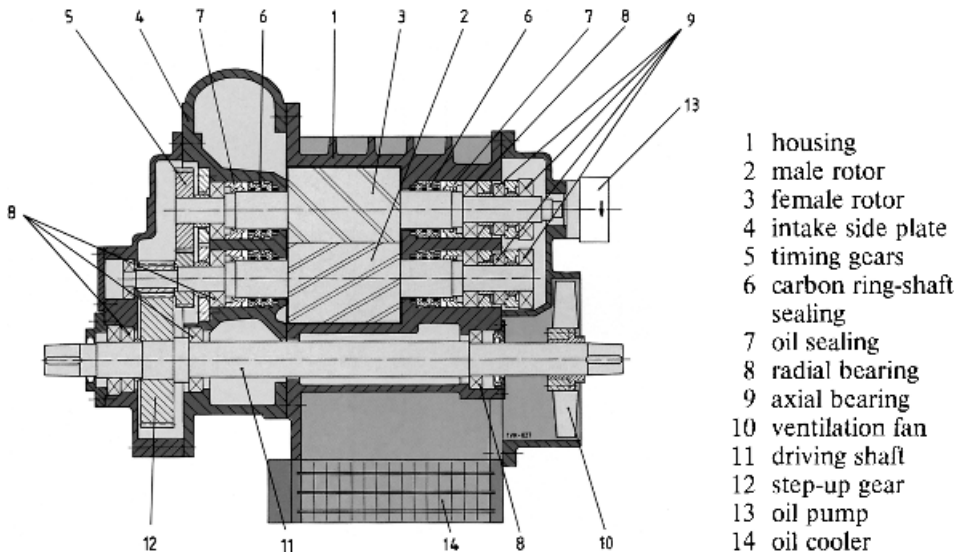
Oil-free rotary screw compressor with integral step-up gears. (Aerzen USA Company, Coatesville, Pa.)
